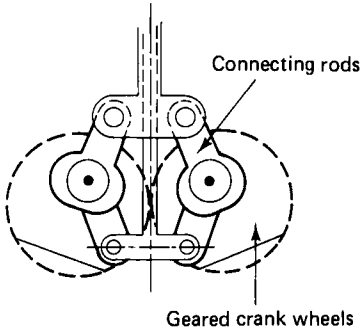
Rhombic drive crank and connecting rod arrangement of a Stirling engine
